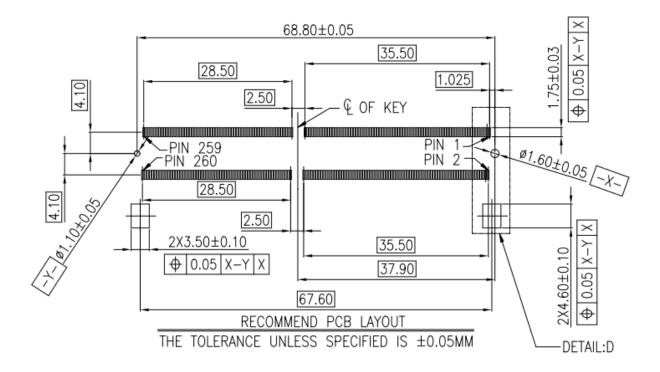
2309409 Recommended PCB Footprint (as shown on manufacturer datasheet)
